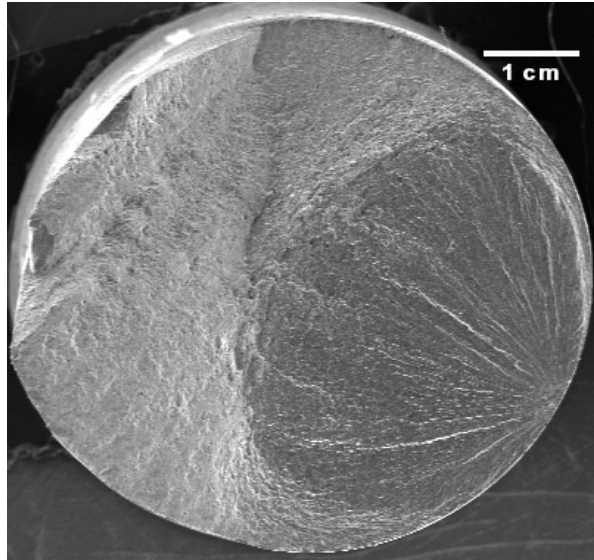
Fracture surface of axial fatigue specimen. Al 7050 T7451.
